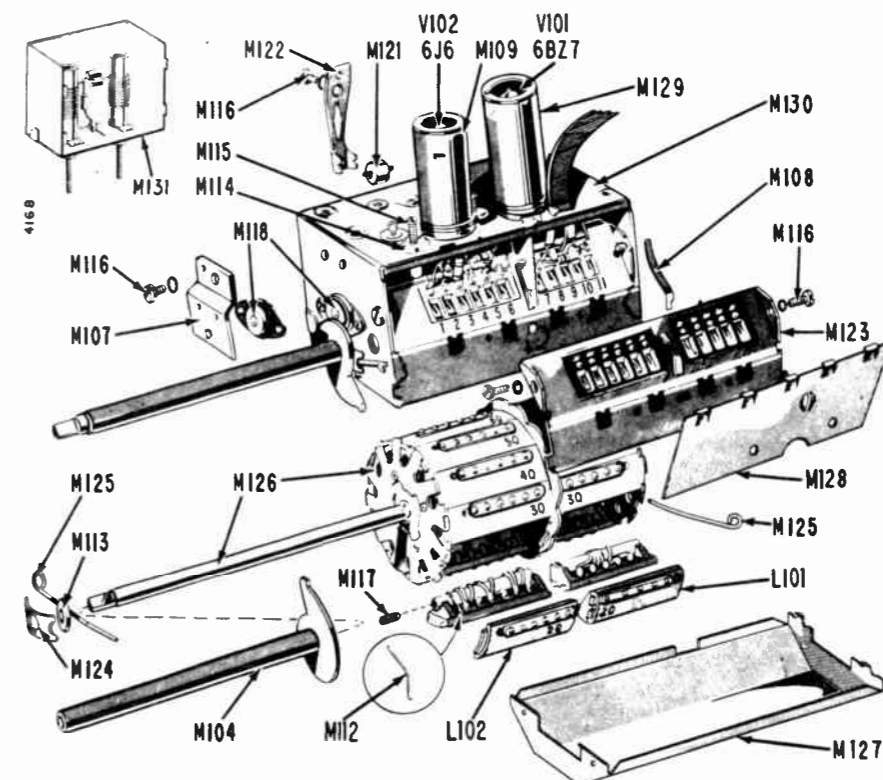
Exploded View, TV Tuner 94D47-2. (For description of parts, see page 36.)
